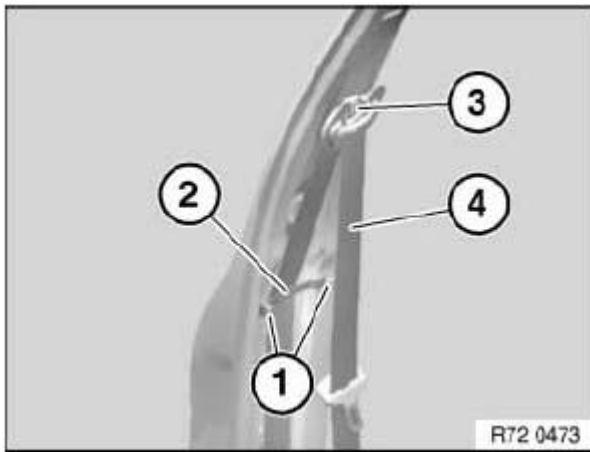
Identifying Screws, Belt Guide, Bolt And Belt
